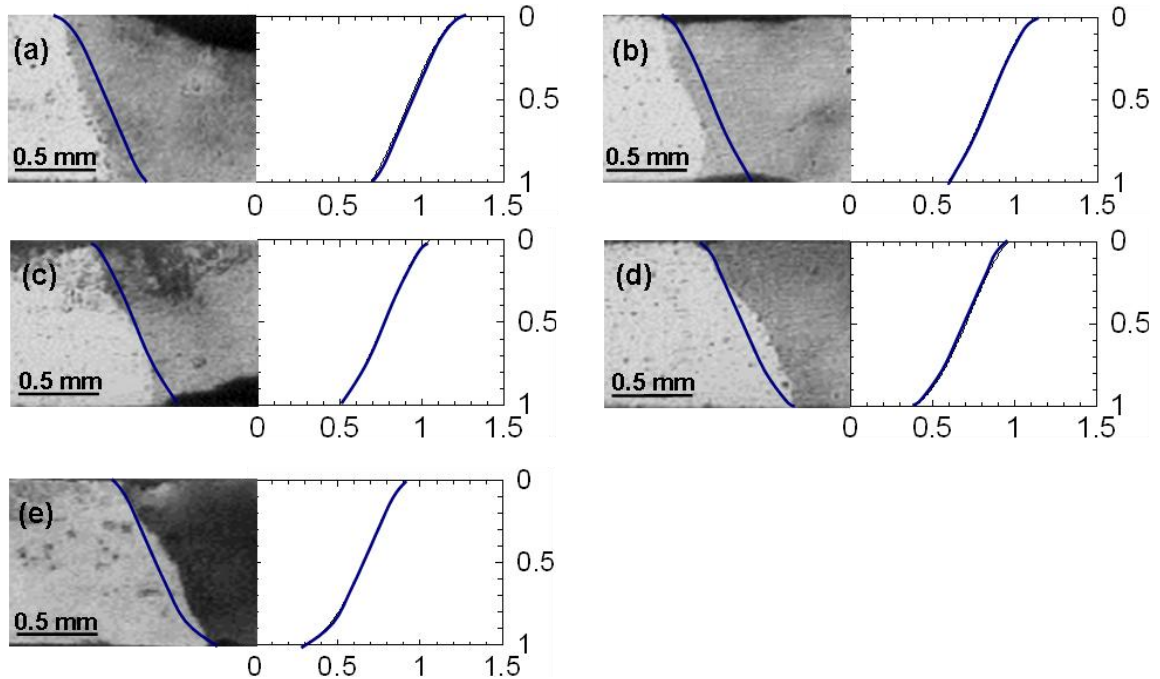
Experimental and calculated weld pool dimensions for the five sets of welding conditions given in Table 5.2, i.e., 2600 W power, 0 mm defocus, and (a) 63.5 mm/s, (b) 74.1 mm/s, (c) 84.7 mm/s, (d) 93.5 mm/s, and (e) 105.8 mm/s. The solid lines are the calculated weld pool boundaries.
